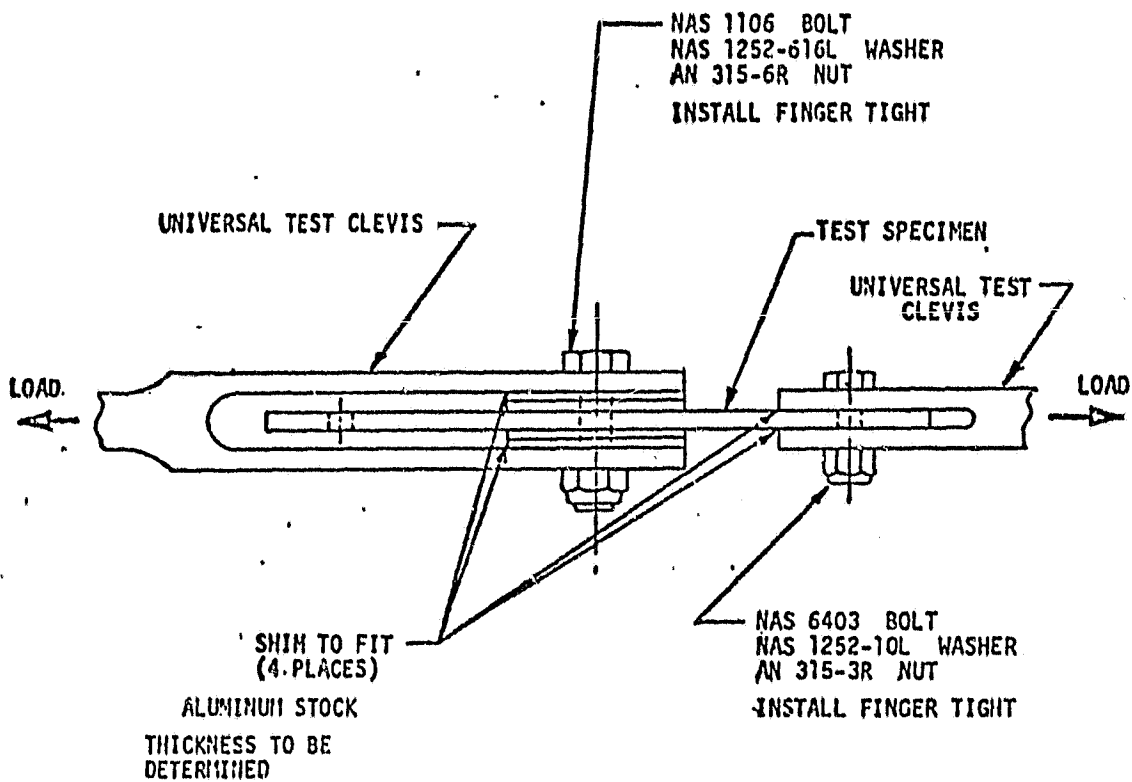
SHEAR BEARING TEST SPECIMEN
